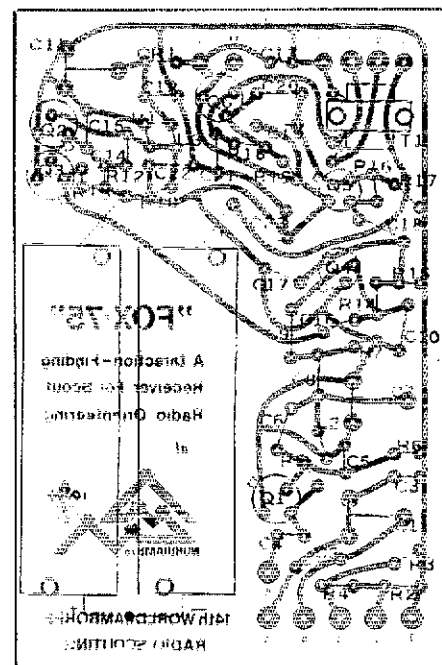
Parts layout and circuit-board details for the FOX-75 receiver. A final check should be made of all parts dimensions before using the layout exactly as shown. Some European components may require slightly different layout from those available in this country.
